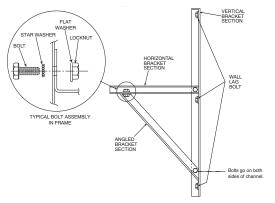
Assembled Mounting Kit (One Section, Diagrammatic)
